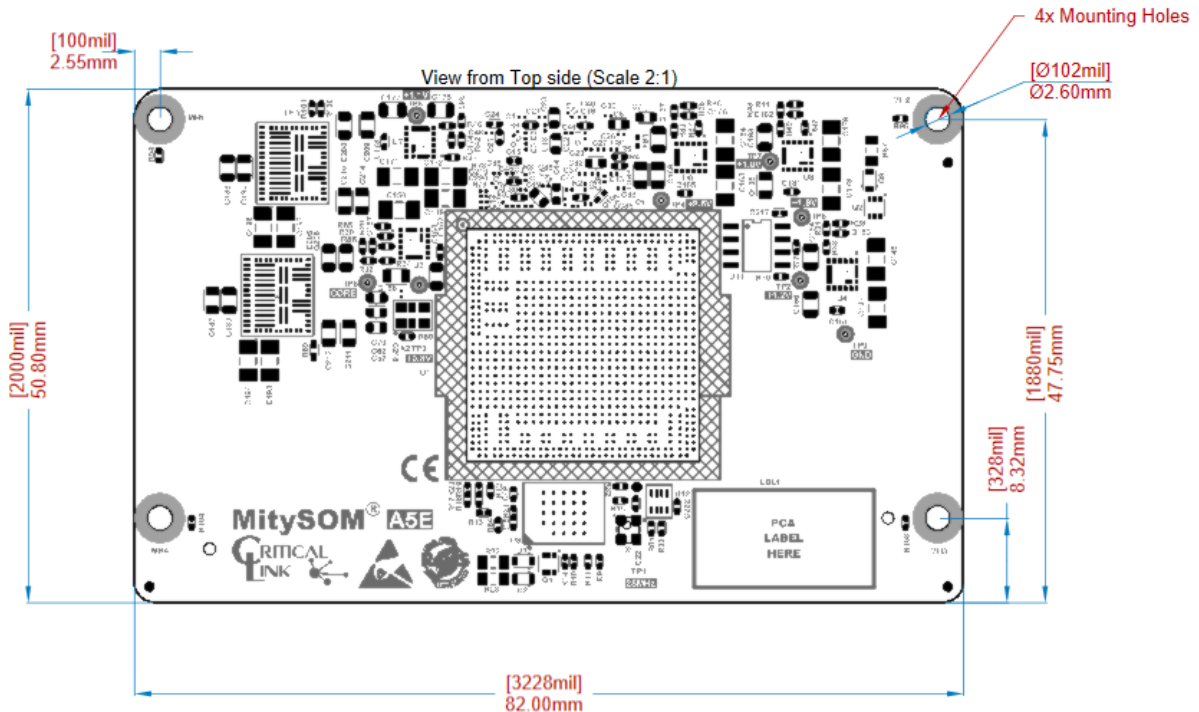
MitySOM-A5E Mechanical Outline, View from Top
